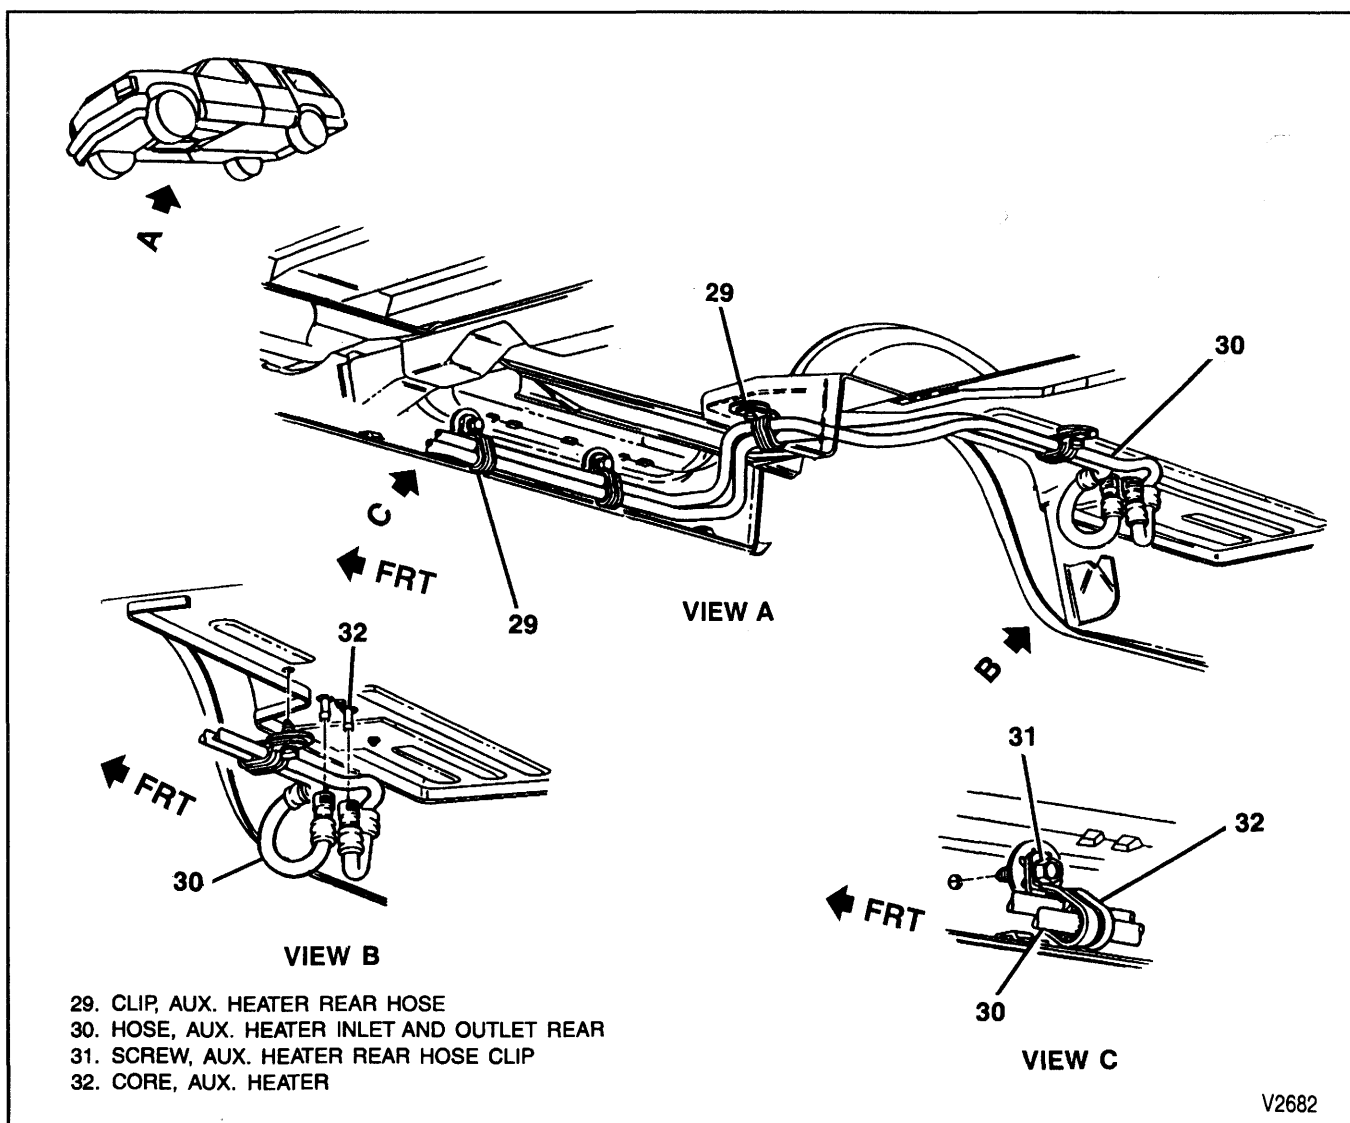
Auxiliary Heater Hose Assembly Routing (Rear)
